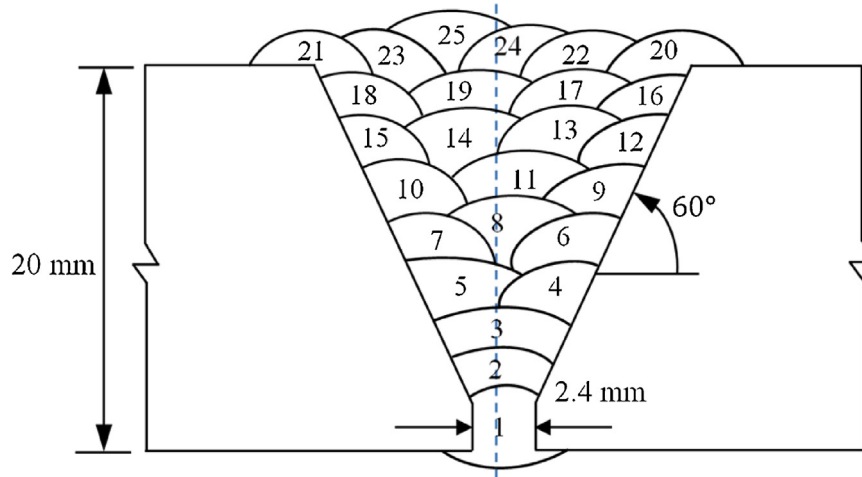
Weld deposition sequence in Specimen I.
